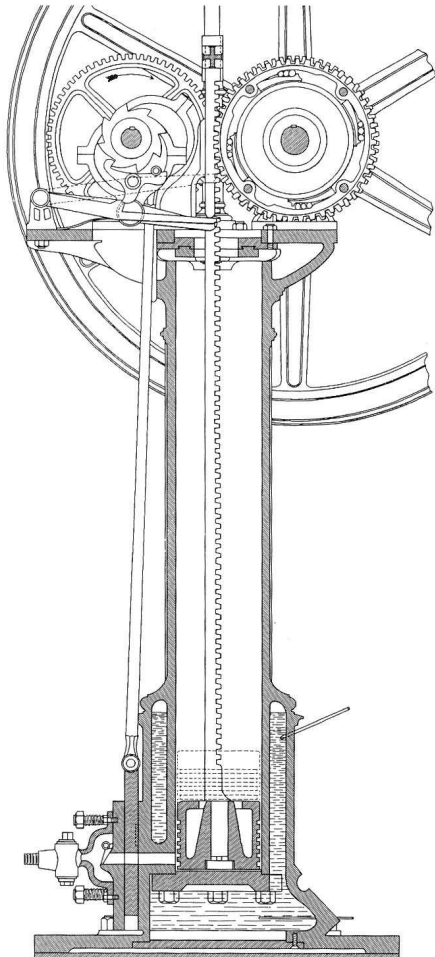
Sectional View of the Otto-Langen 1866 Free-Piston Atmospheric Gas Engine
